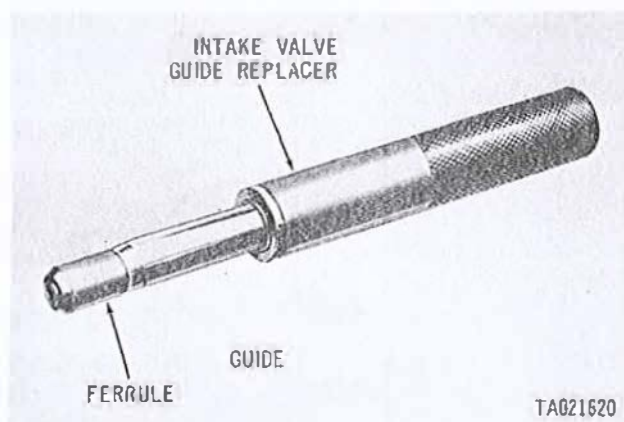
Positioning intake valve guide on valve guide replacer.
